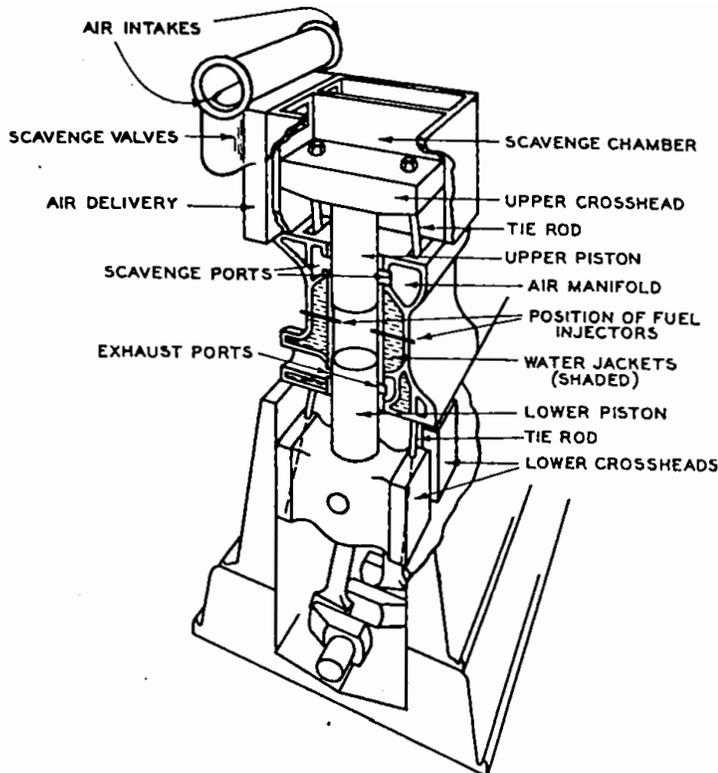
SECTIONAL VIEW OF TWO CYLINDER UNIT OF FULLAGAR ENGINE.
